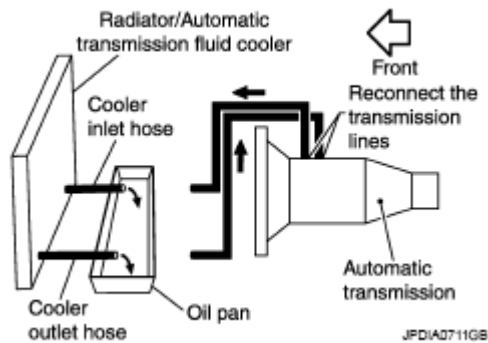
Allowing Any ATF That Remains In Cooler Hoses To Drain Into Oil Pan
